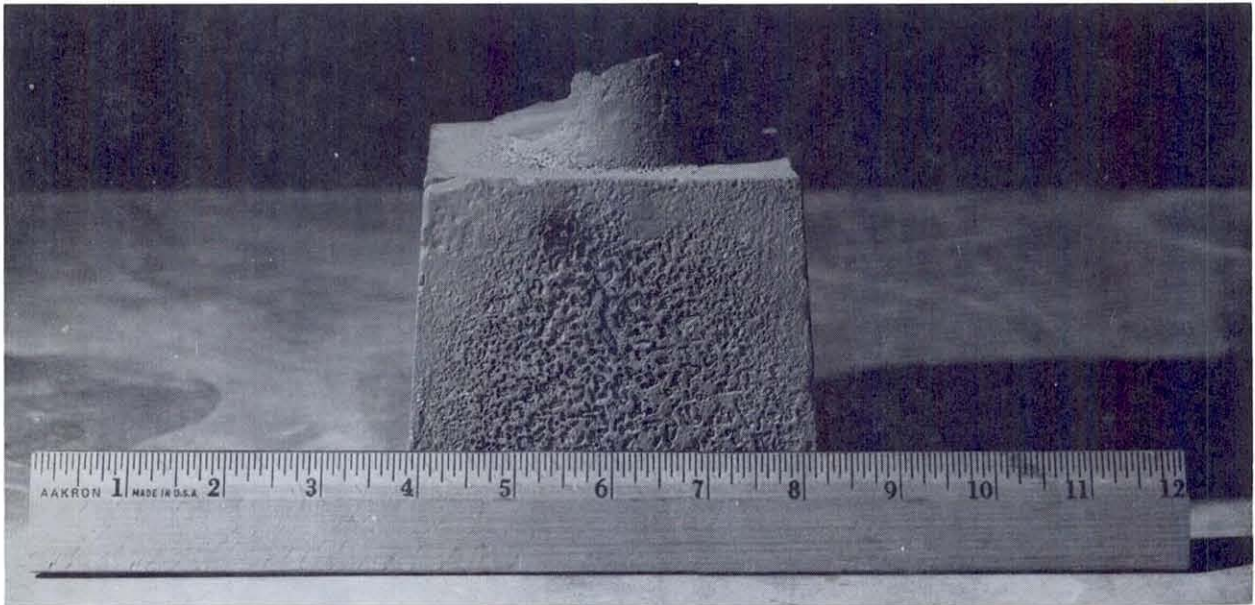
Four-inch cube cast in zirconia-washed chromite mold showing that the metal has reacted with the mold material during casting.
